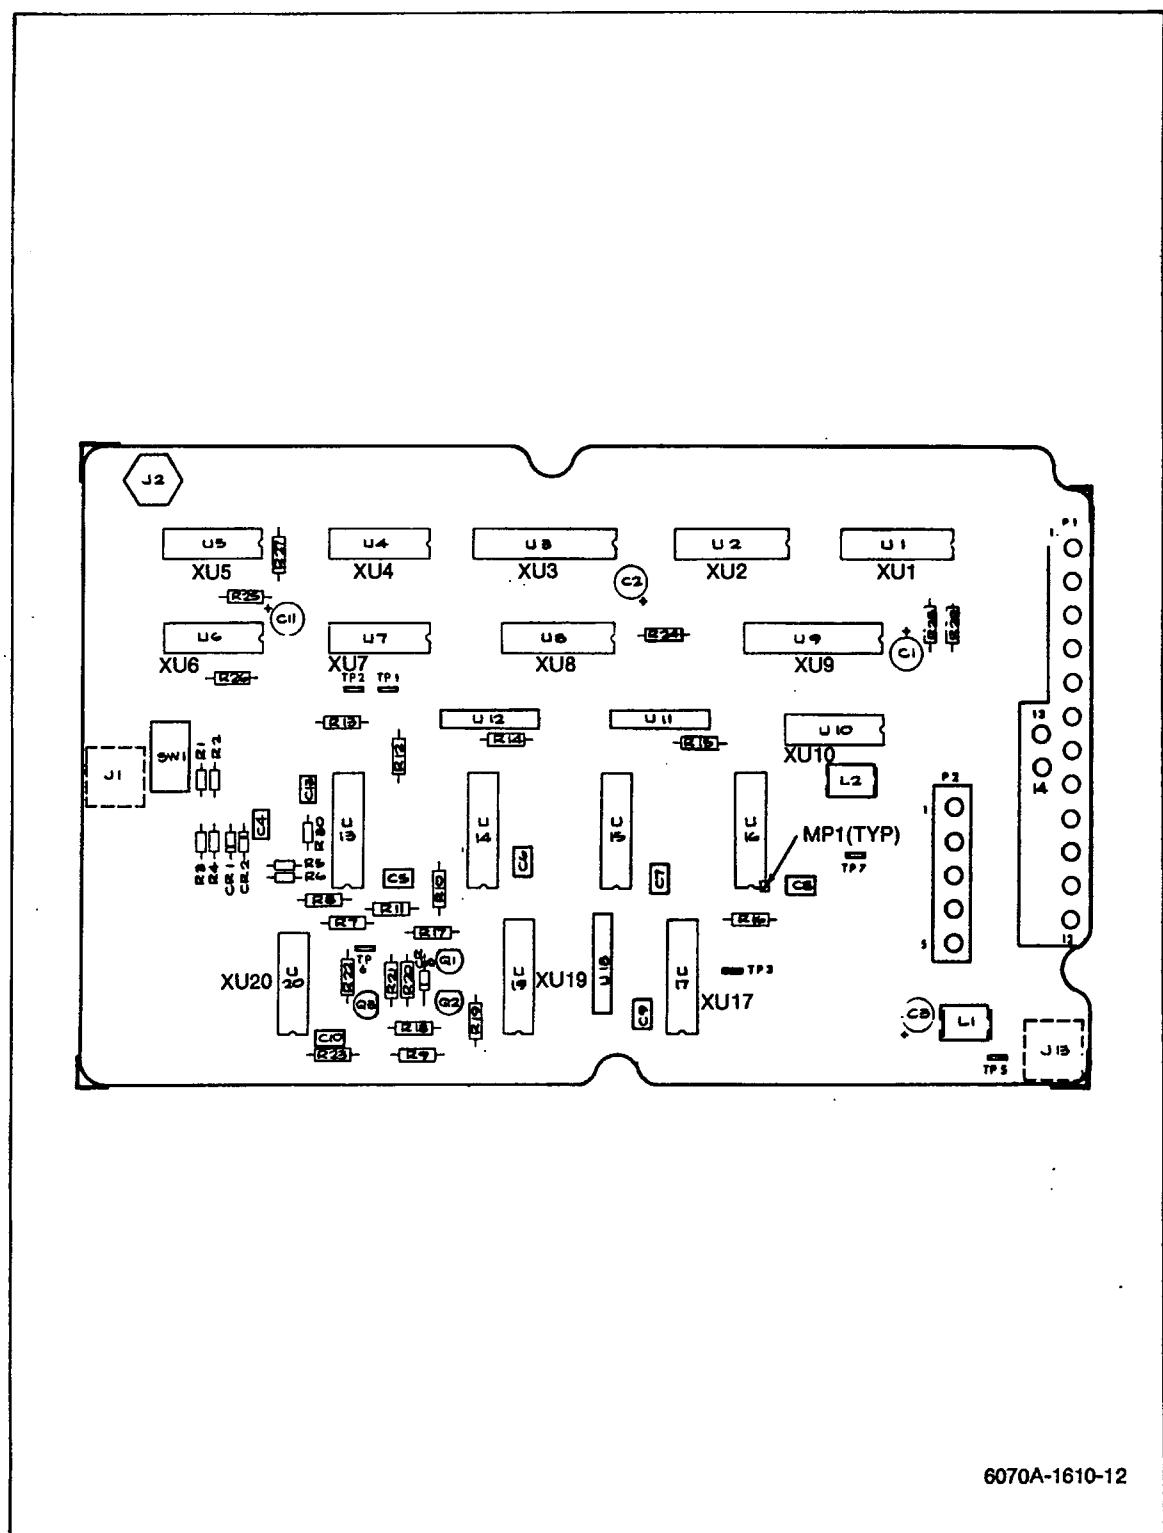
A3A4 N/1 Divider PCB Assembly
